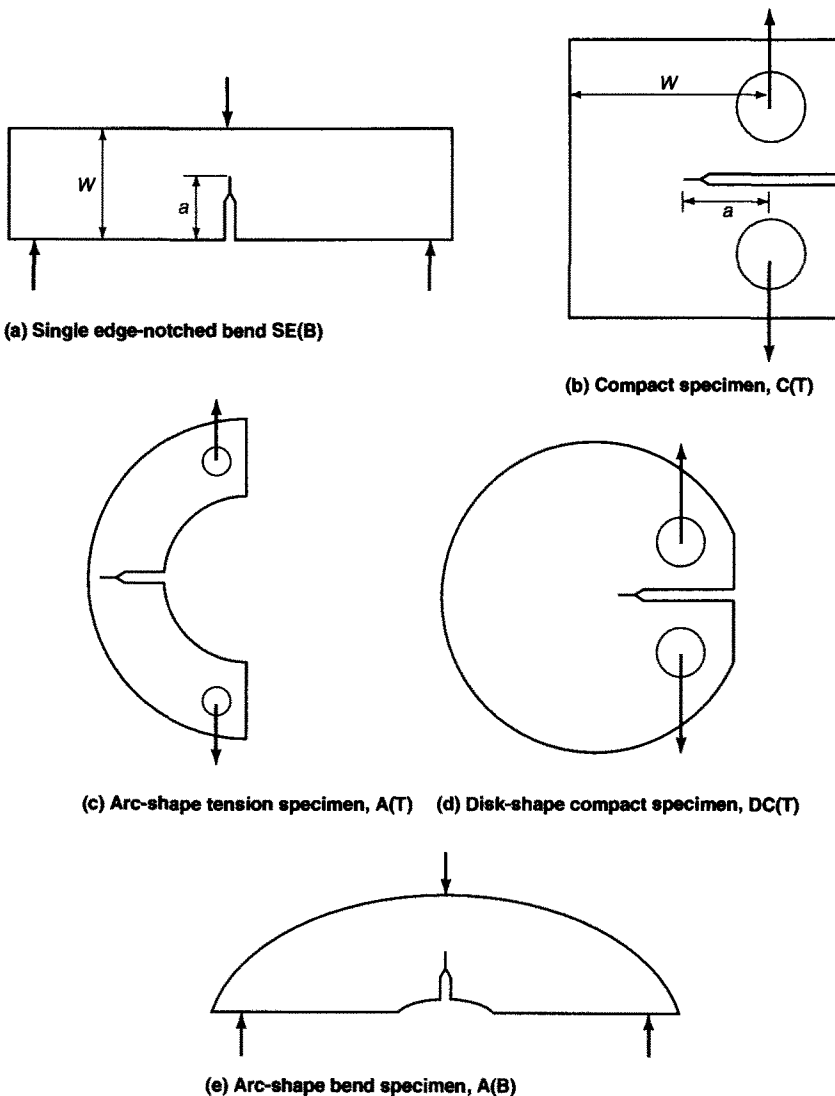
Specimen types used in plane-strain fracture-toughness (K_{Ic}) testing (ASTM A 399)
